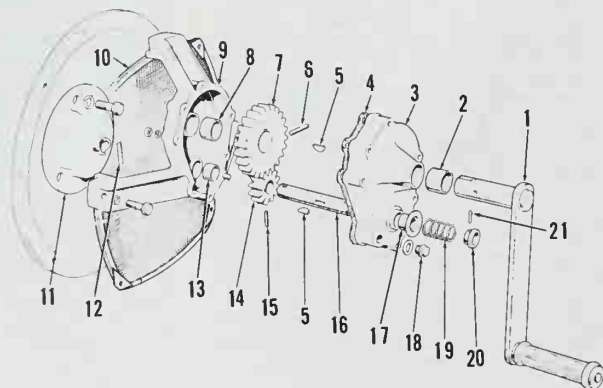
Exploded view of geared-up starting used on some ST2 and ST3 engines.
